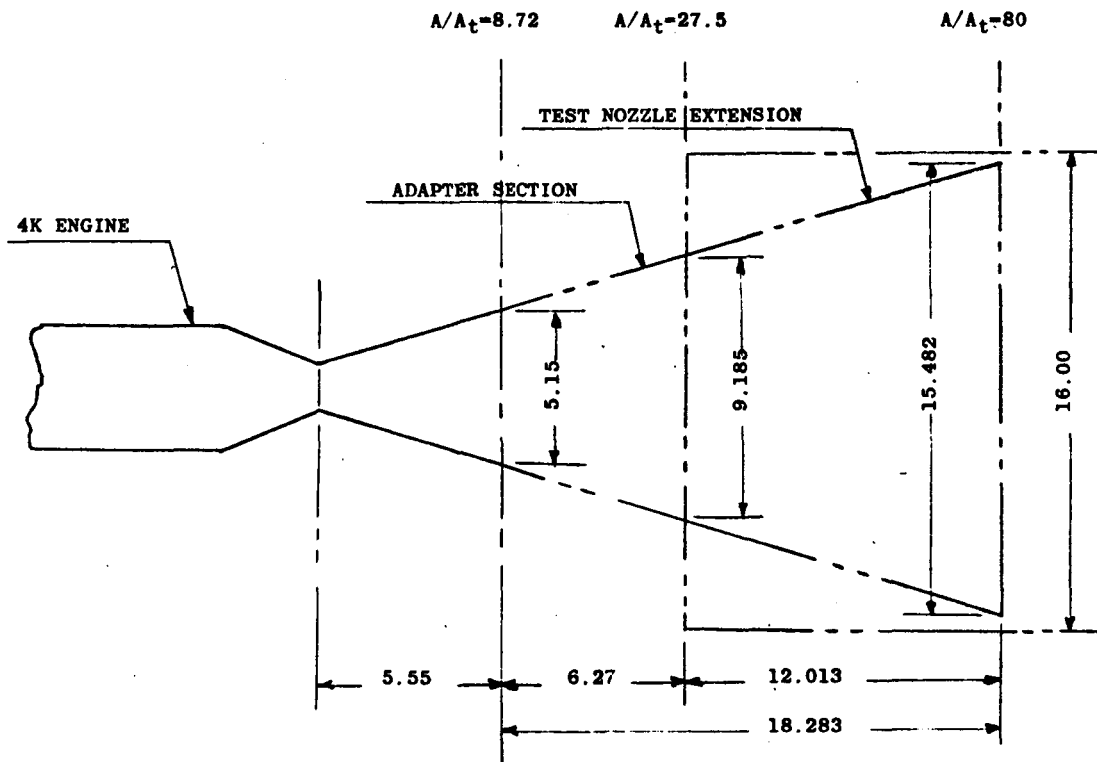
Schematic Drawing of 4-K Engine Test Arrangement
